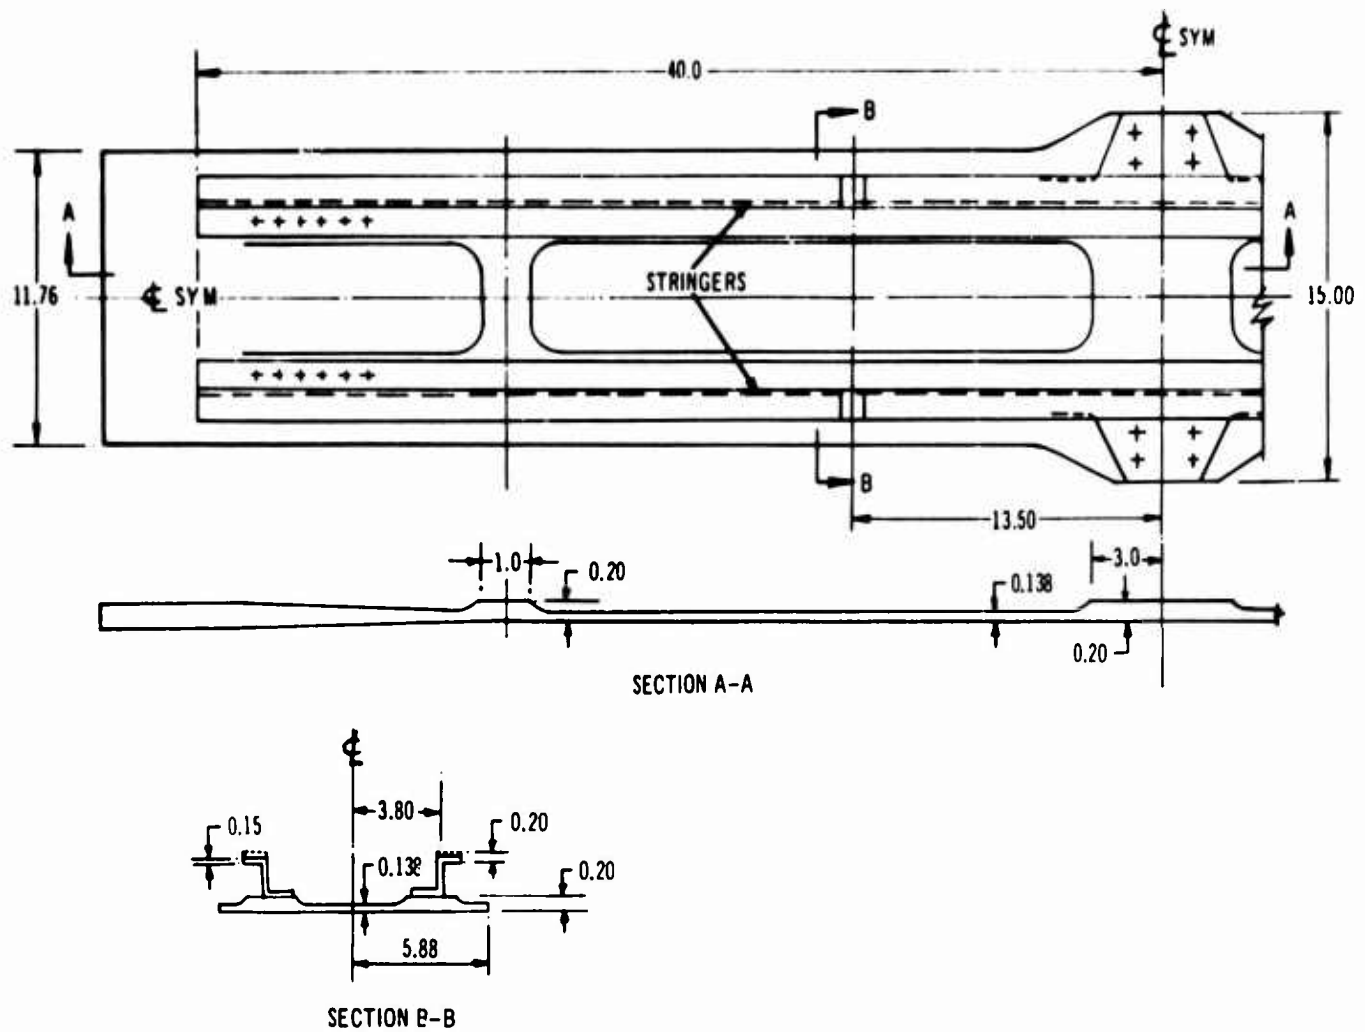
Flap Track Attachment Fatigue Test Panel
